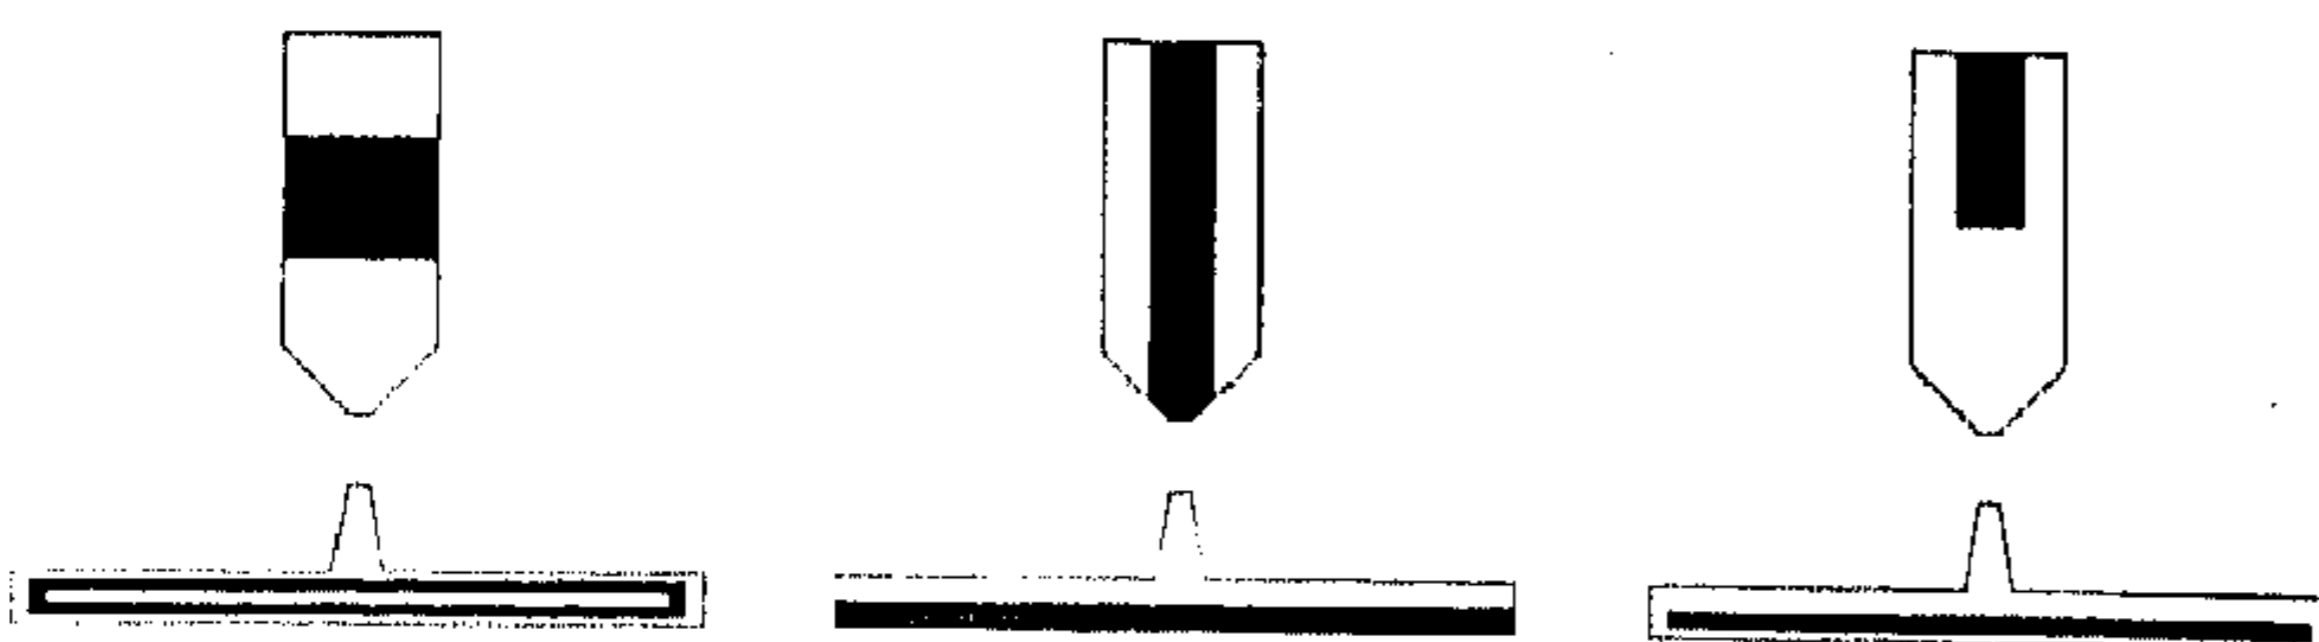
Two component injection molding with sequential, simultaneous and combined injection
